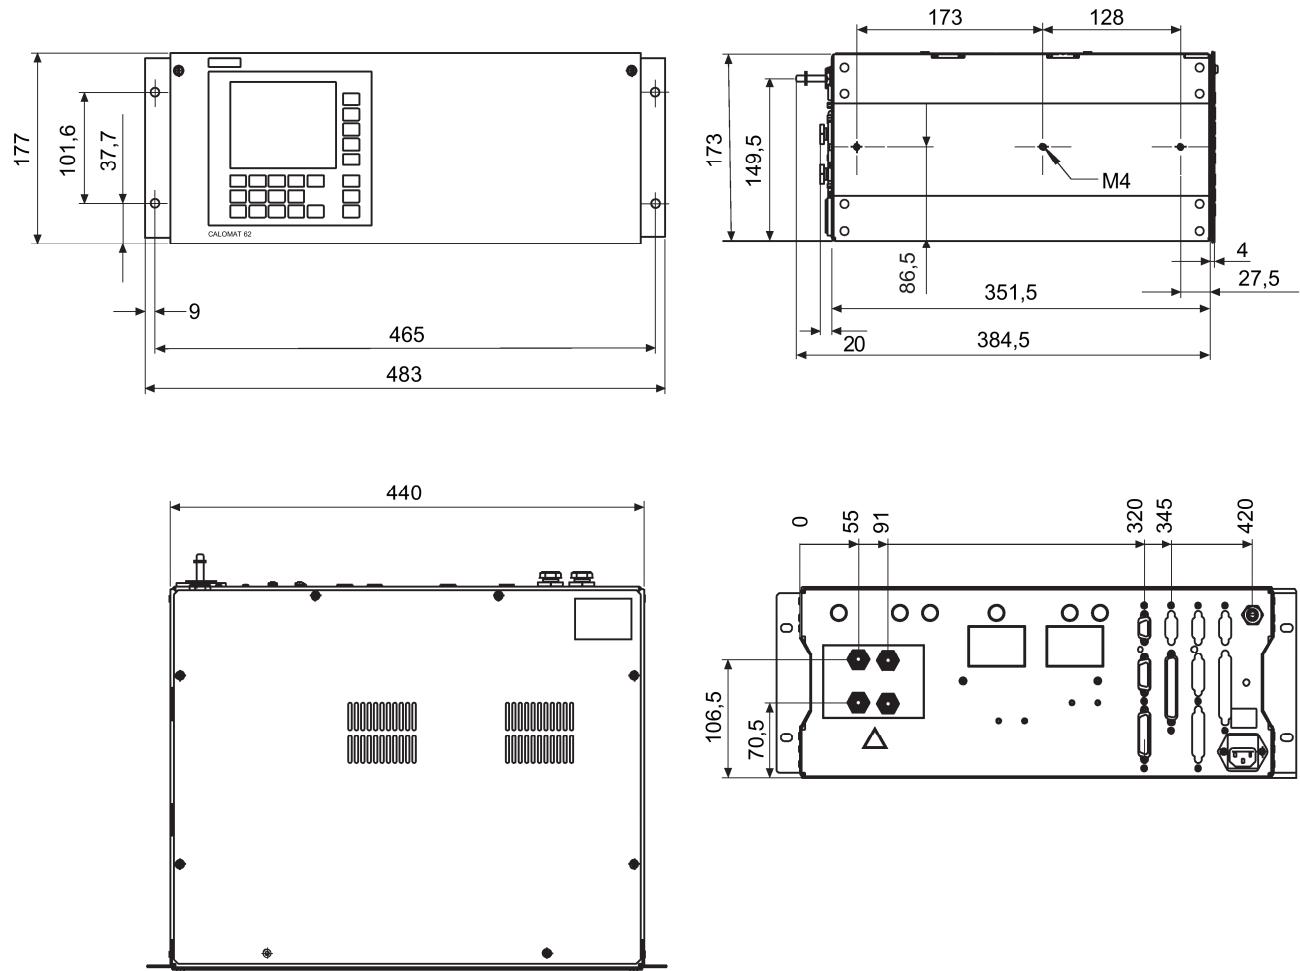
Dimensional drawing of CALOMAT 62E rack-mounted device
